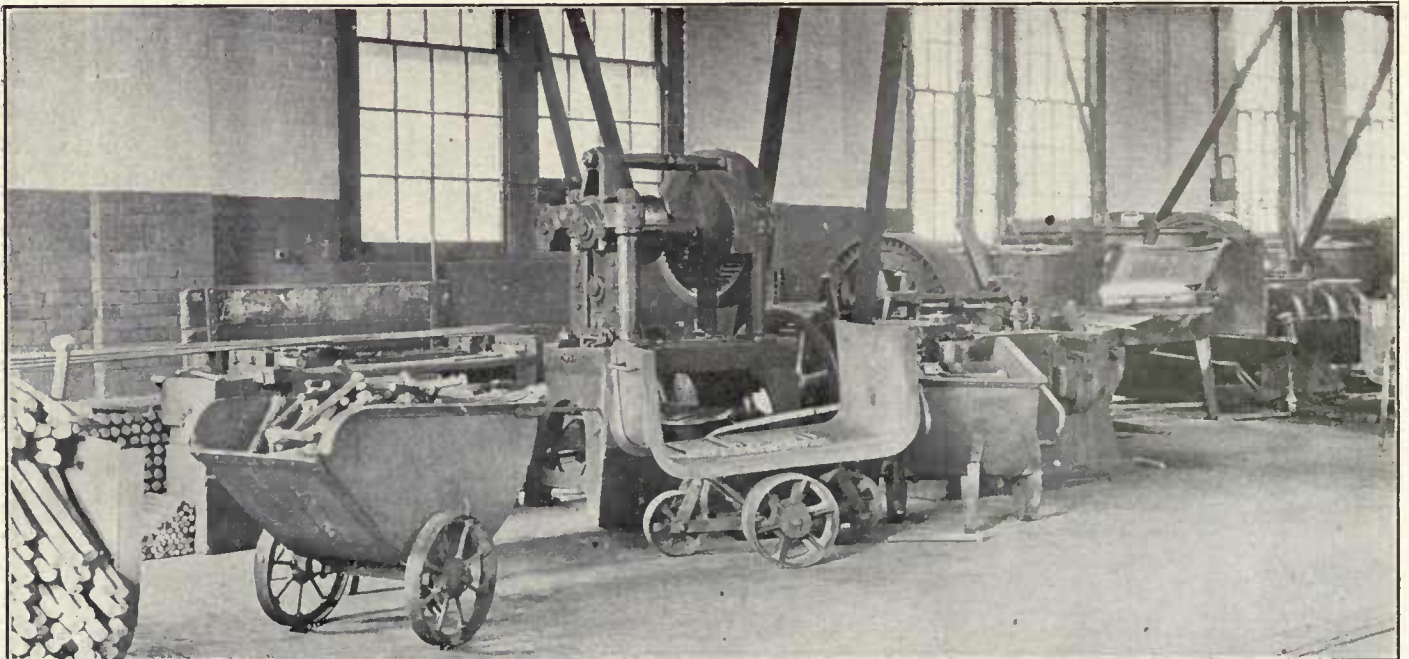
Partial View of the Bolt Manufacturing Side of the Blacksmith Shop.
